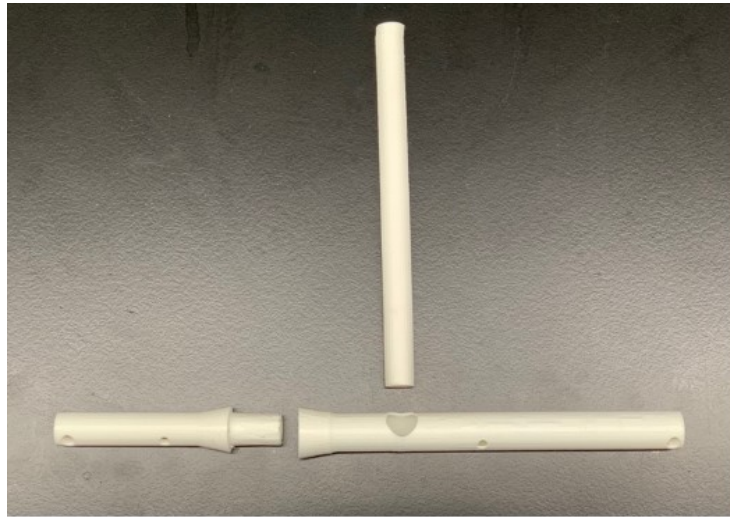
Layout for the 3D printed parts of the swimming device. All connecting wires can go inside the parts to avoid cluster and entanglement.
